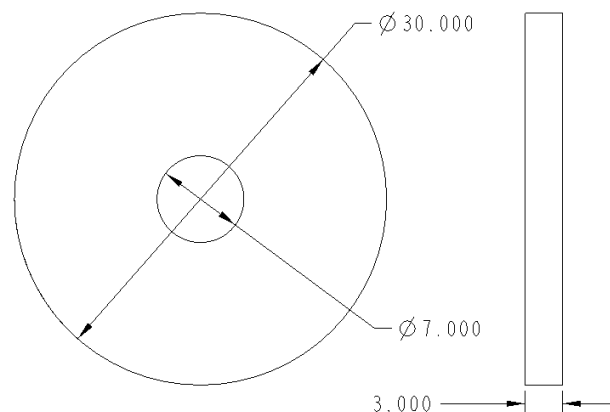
Mechanical dimensions of the tested specimens (all dimensions in millimeters).
